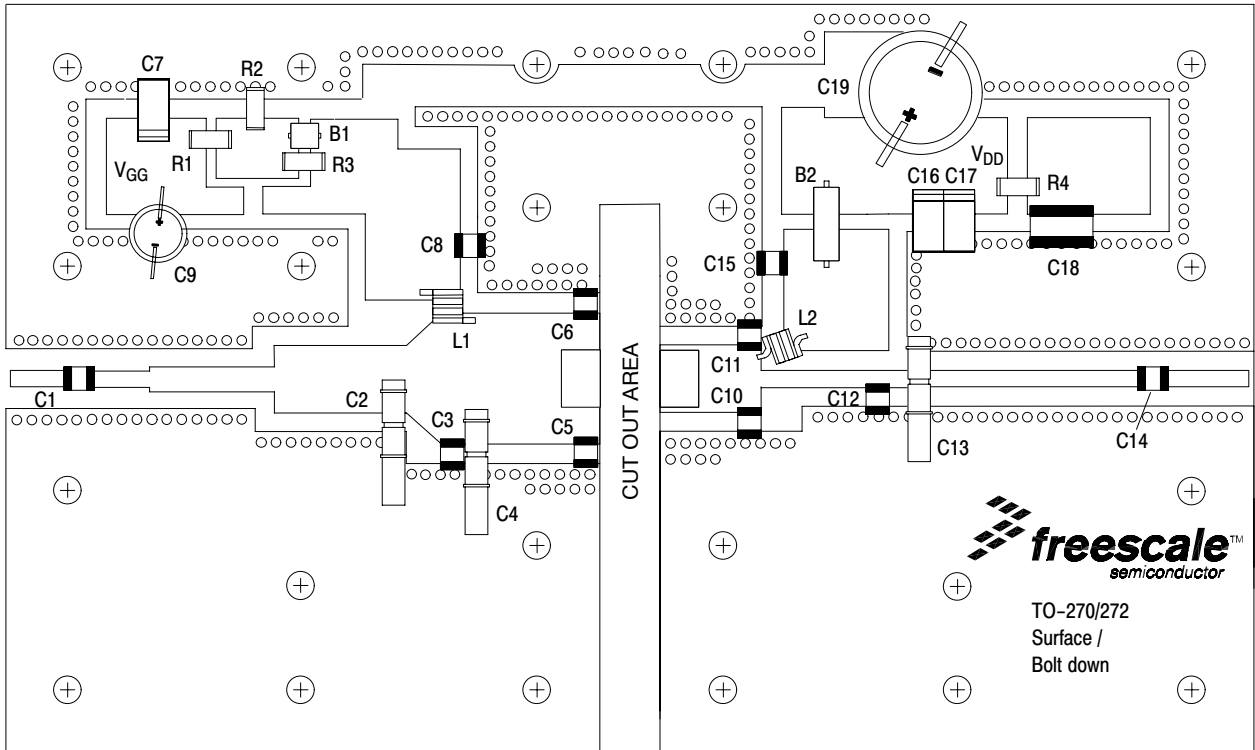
MRF6S9060NR1(NBR1) Test Circuit Component Layout
